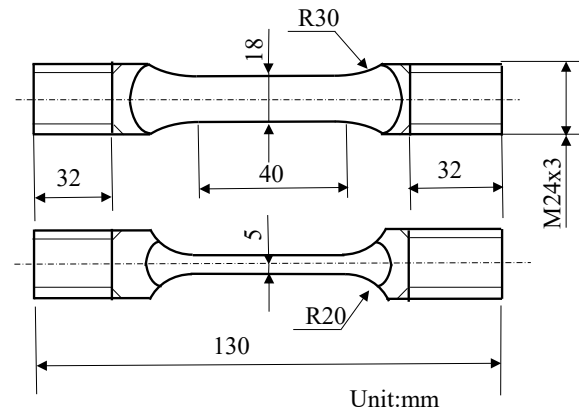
Shape and dimension of creep specimen in Inconel 718.
